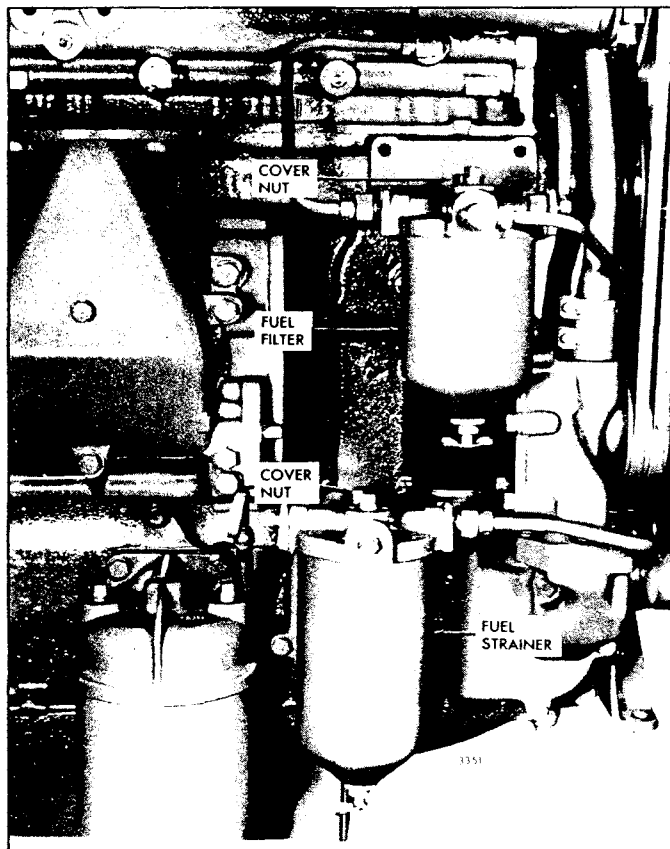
Typical Fuel Strainer and Fuel Filter Mounting
